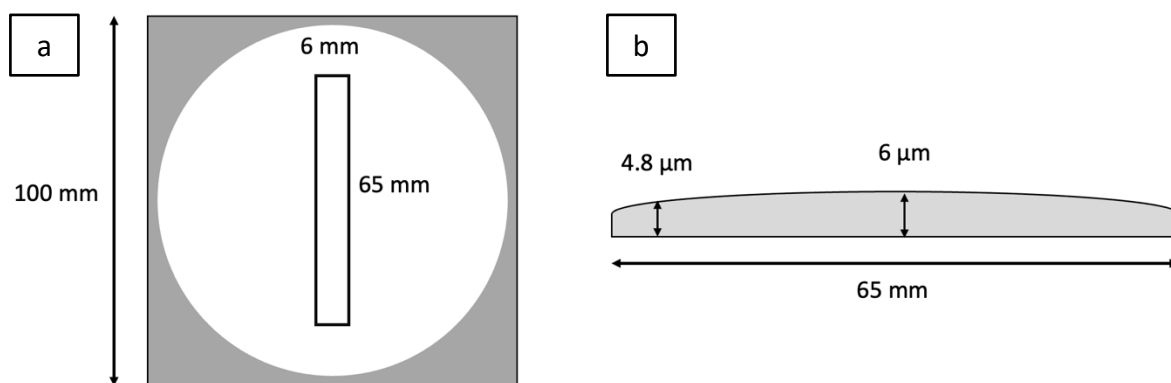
Schematic illustration of: (a) the dimension of the designated sectioning area of a tensile test specimen; (b) the cross-sectional view of the thickness of the specimen measured at the centre and the edge.
